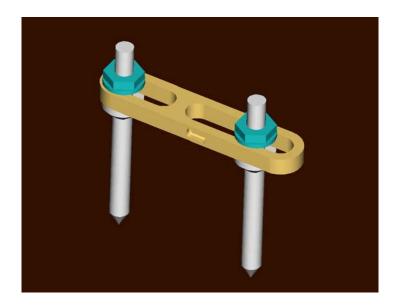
DePuy Monarch Spinal System Modeled in Pro/Engineer (showing machined pocket), by D. Schenberger
